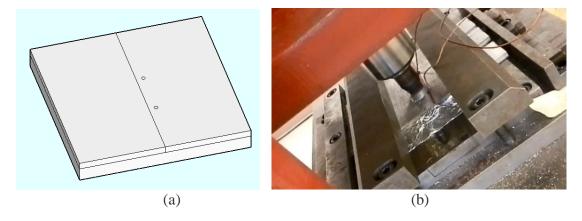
(a) Two aluminum workpieces insulated by the sand layer and (b) friction stir welding of aluminum workpieces insulated with the sand layer held in the fixture and two thermocouples attached to a workpiece.
